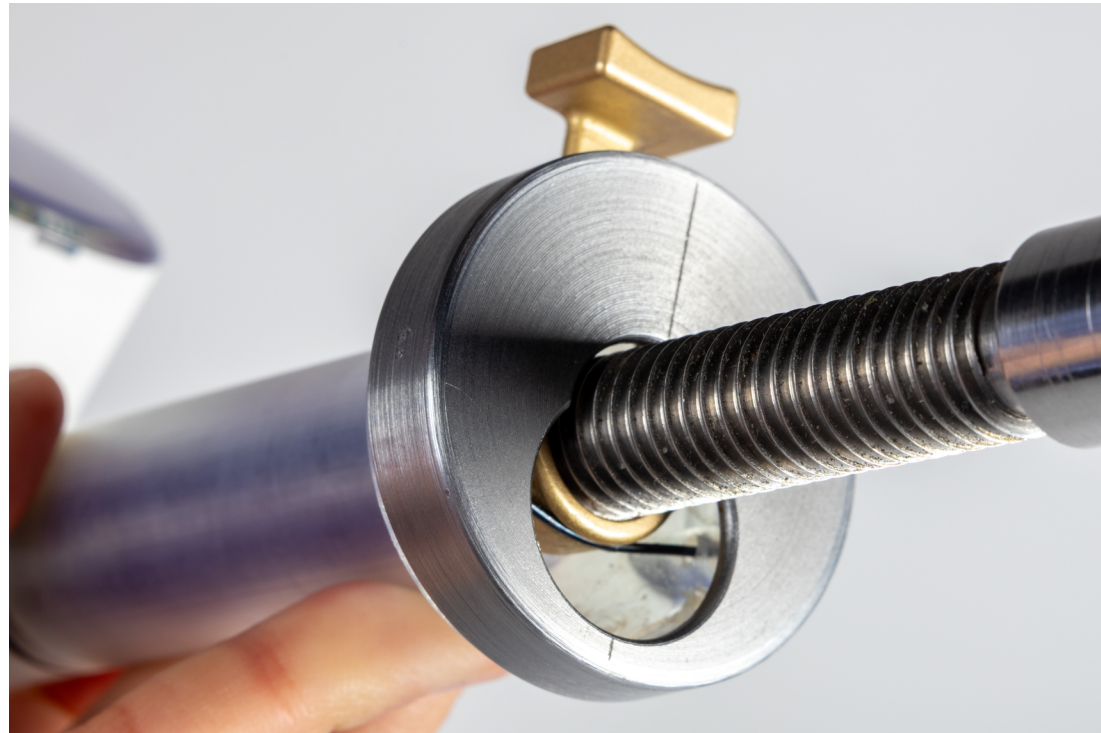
Detail of the lock mechanism of Pompa. The half nut is placed on top of a thin and superelastic nitinol rod, which acts as a spring. The assembly of the half nut precompresses the spring, so the half nut is constantly being pushed to engage with the plunger.
